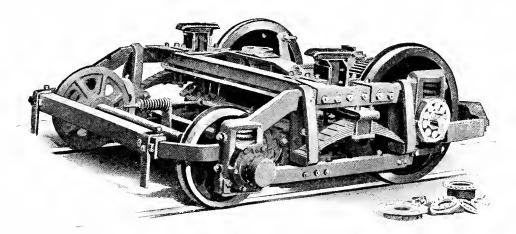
Rollway Journal Bearings Applied to Electric Motor Truck. Railway Roller Bearing Company.
